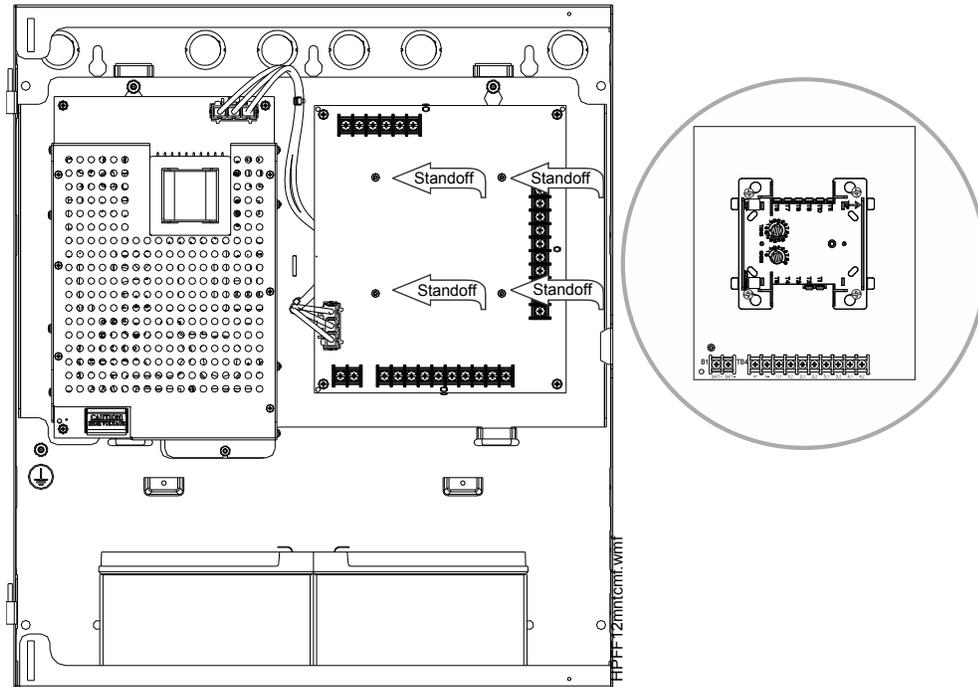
Mounting Details for Control & Relay Modules from Honeywell Fire Systems
